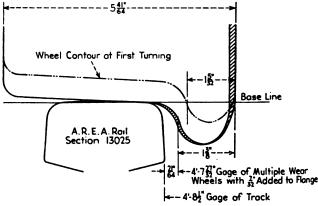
Position on rail of multiple-wear wrought steel wheel with metal added to face of flange and back of flange and rim to obtain 7/32 in. increase in flange thickness
